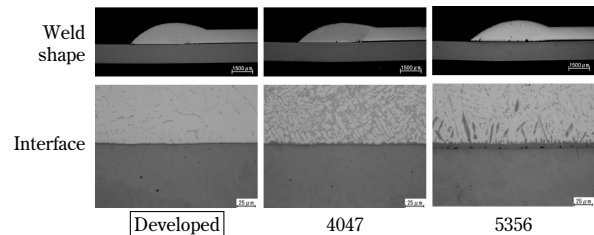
Macro and micro structures of weld shape and interface⁷⁾
